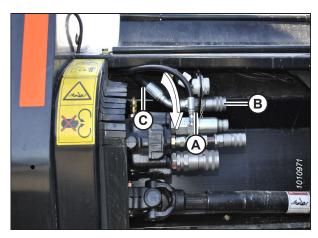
Auger and Reel Pressure Coupler and Hose – 4.9 m (16 ft.) Header Shown
